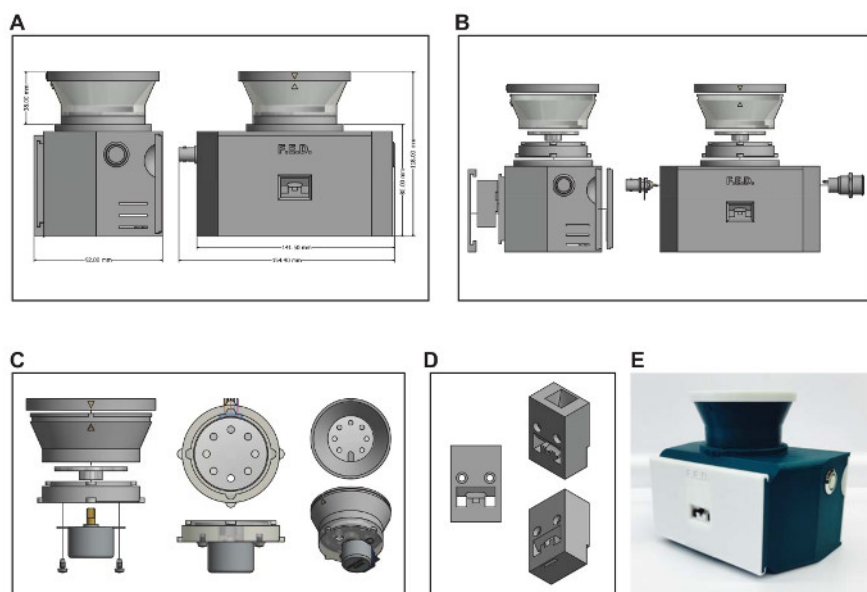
3D Designed FED Components. (A) Measurements of assembled FED. (B) Exploded view of 3D printed components in an assembled FED. (C) Exploded view of complete pellet hopper assembly (left), assembly of stepper motor to rotating disk (middle), and assembly of food silo to rotating disk (right). (D) Design of food well with arms to secure the photointerrupter for pellet detection. (E) Photograph of fully assembled FED. [Please click here to view a larger version of this figure.](#)
